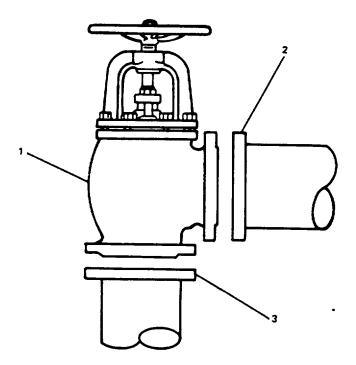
Remove Stop Check Angle Valve (Typical).
